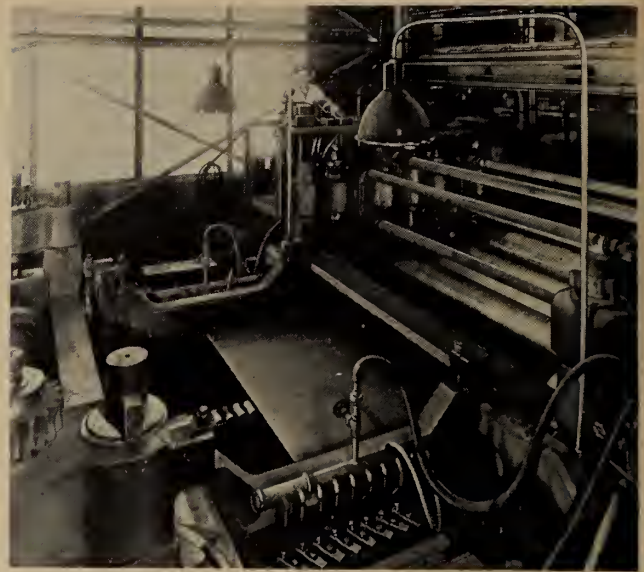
(below). Forming operations for line pipe U, crimp, and closing prior to flash-welding.
